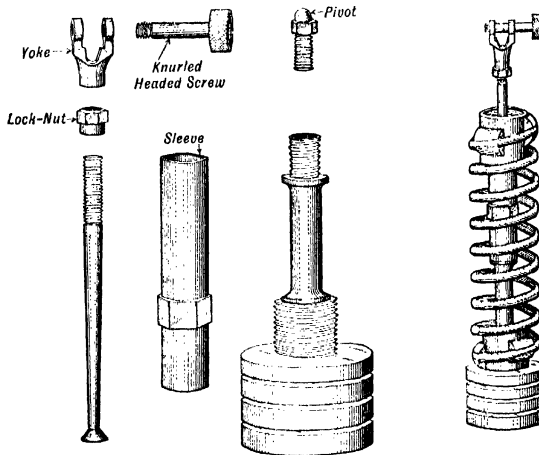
Indicator Piston and Spring for Thompson Indicator.
